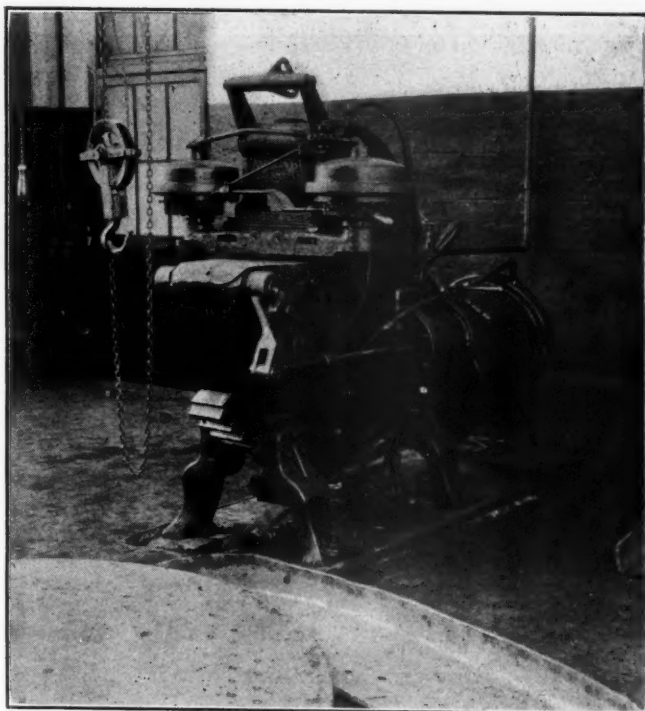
Boiler Sheets Are Flanged Cold on This McCabe Pneumatic Flanging Machine
